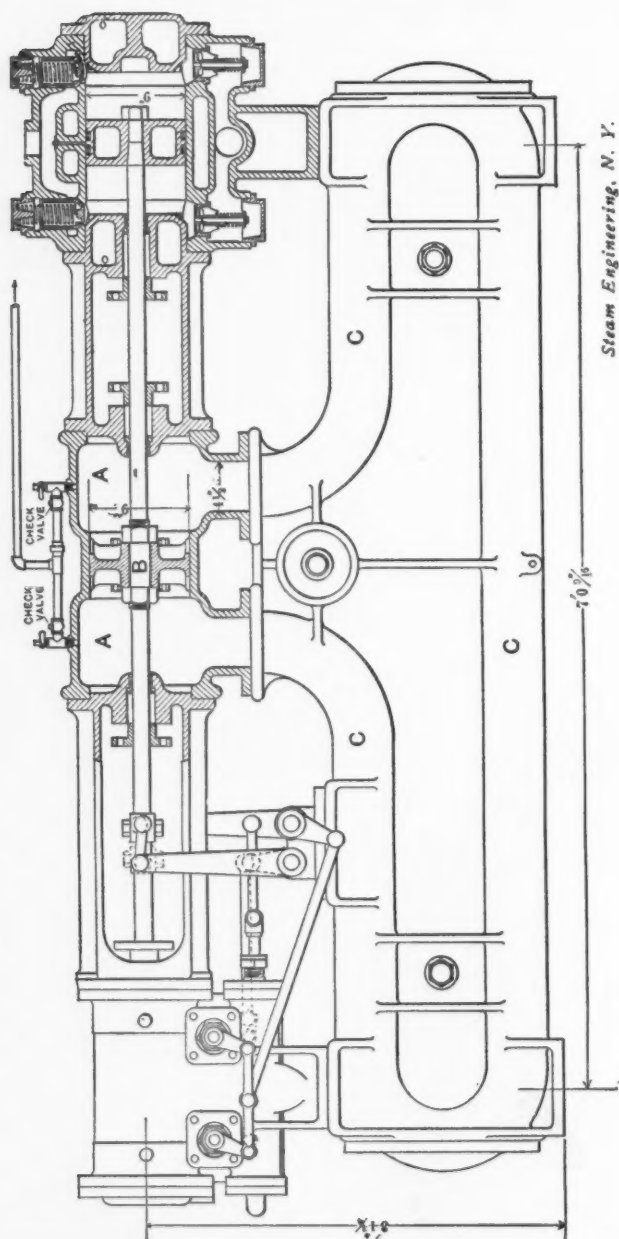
SECTION THROUGH STEAM CYLINDER.
